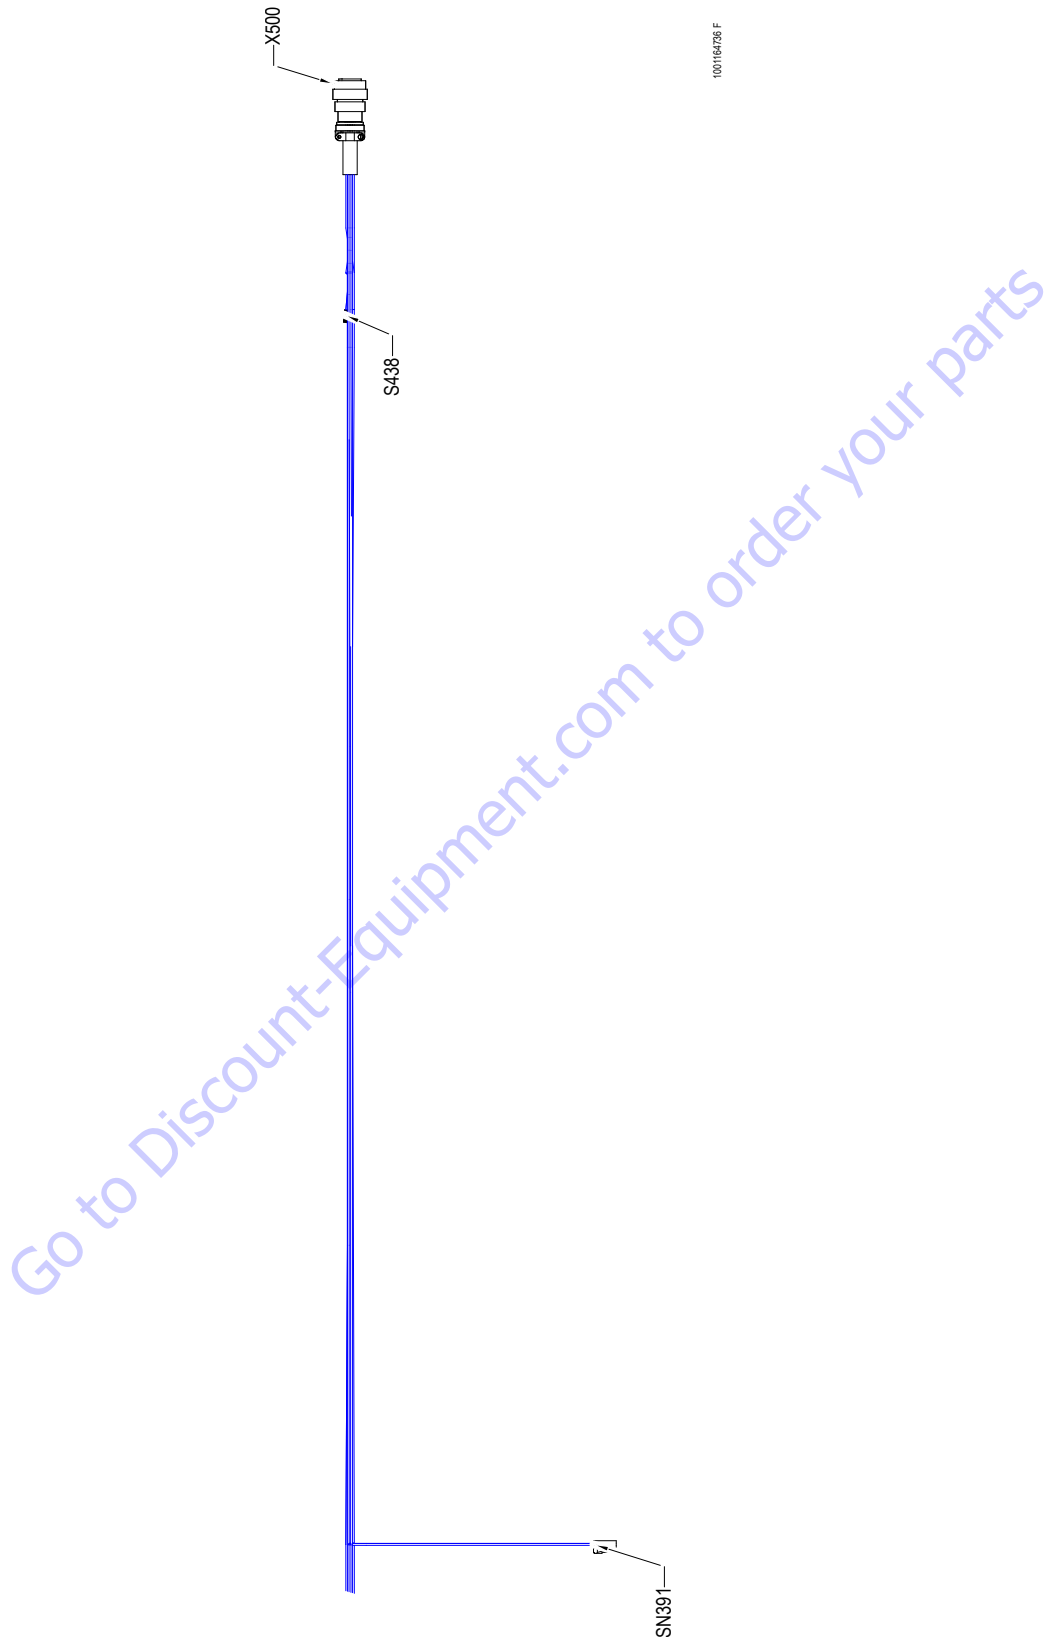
Main Valve Harness - Sheet 5 of 8
